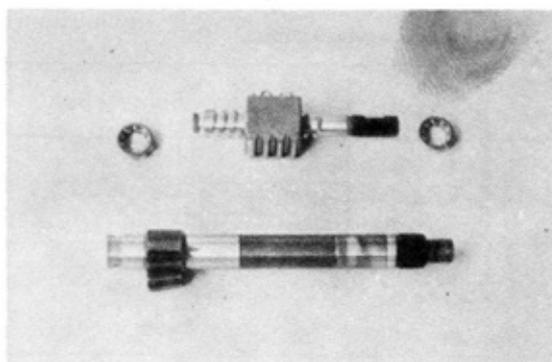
Worm Assembly and Sector Shaft Inspection
